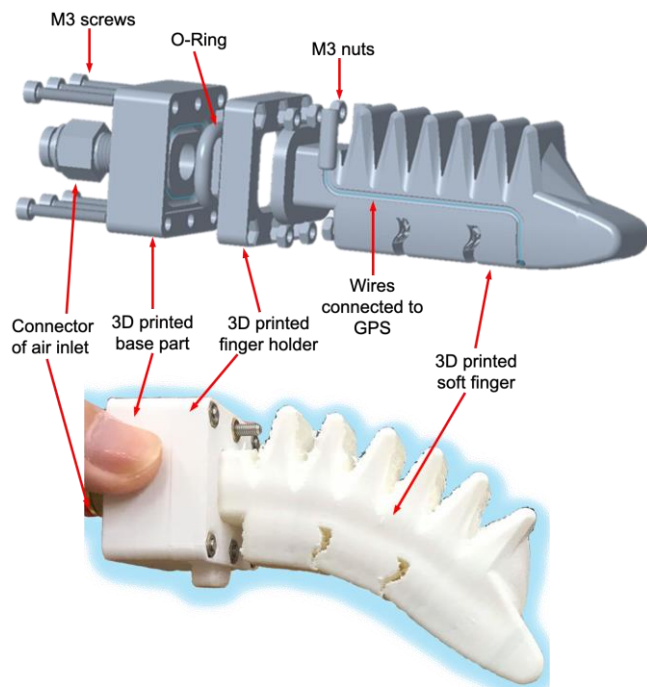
Assembly design of the pneumatic soft finger with GPS.
